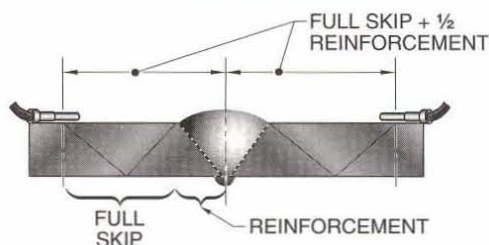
UT of the fusion face and the weld body consists of examining the entire weld volume, which is a full skip distance plus one-half the weld reinforcement width.
